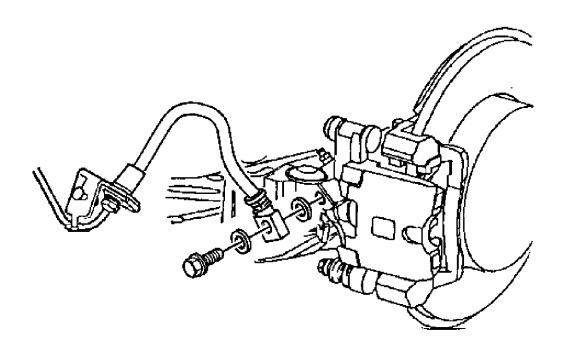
Brake Hose To Caliper View Courtesy of GENERAL MOTORS CORP.
